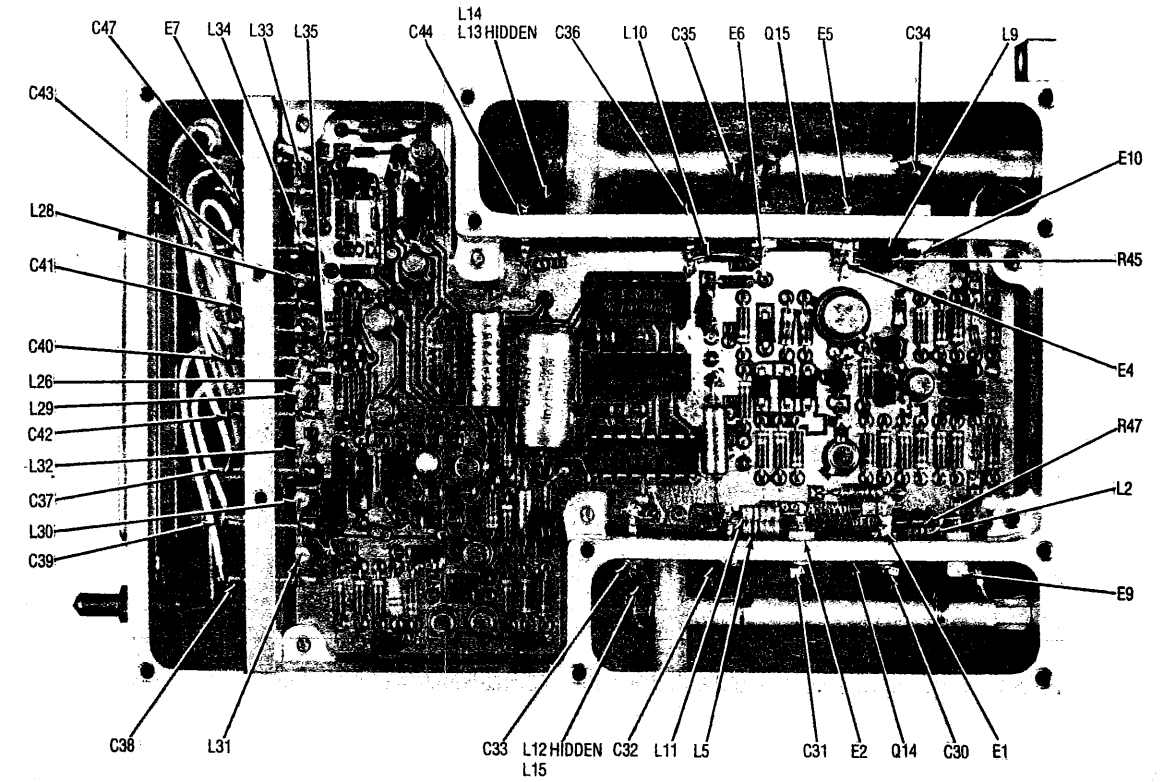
UHF VCO 1A4 Parts Location (Sheet 1 of 2)
